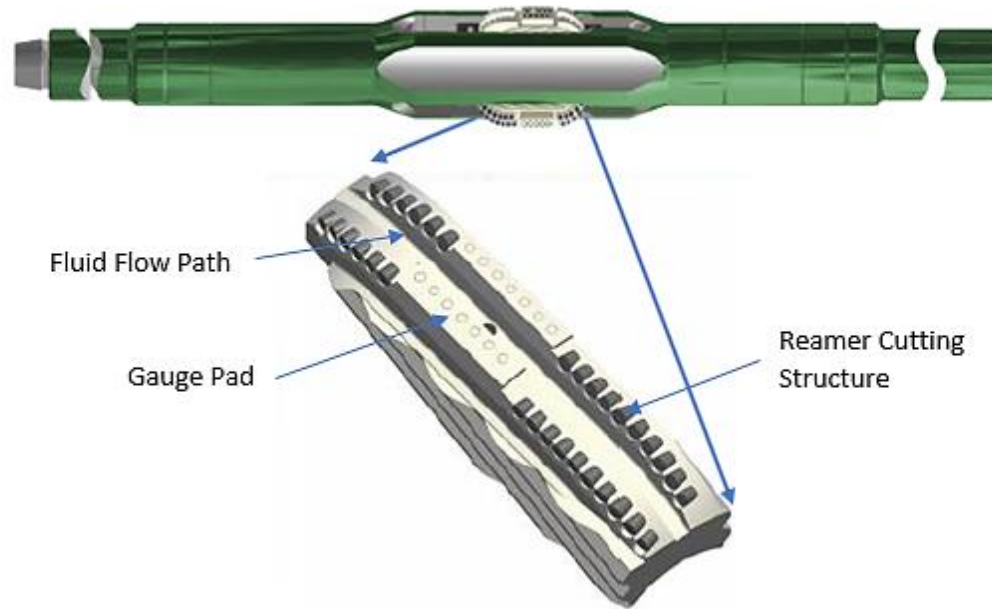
Concentric reamer and reamer cutter block used in hole enlarging operations [19]
